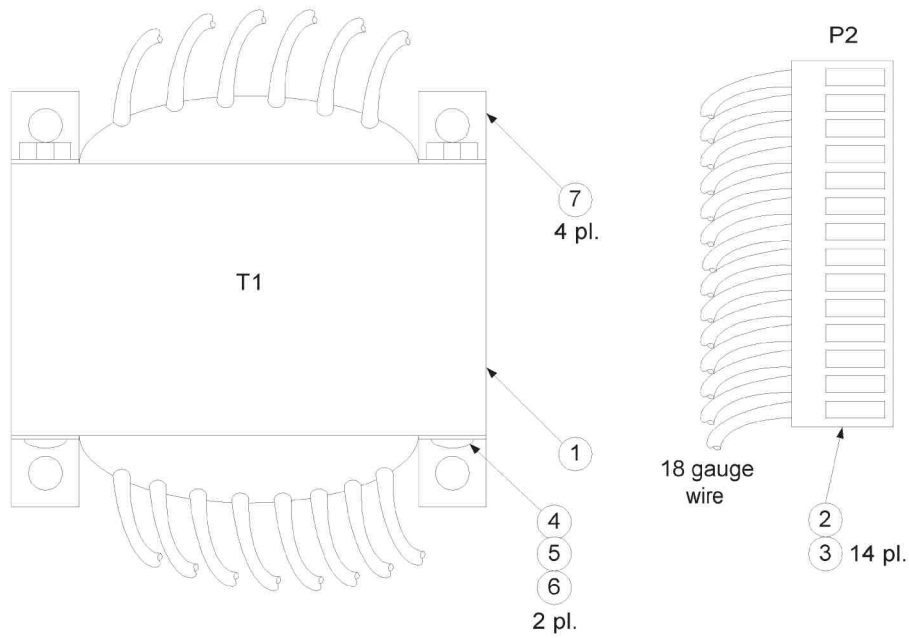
TRANSFORMER ASSEMBLY EXPLODED VIEW
